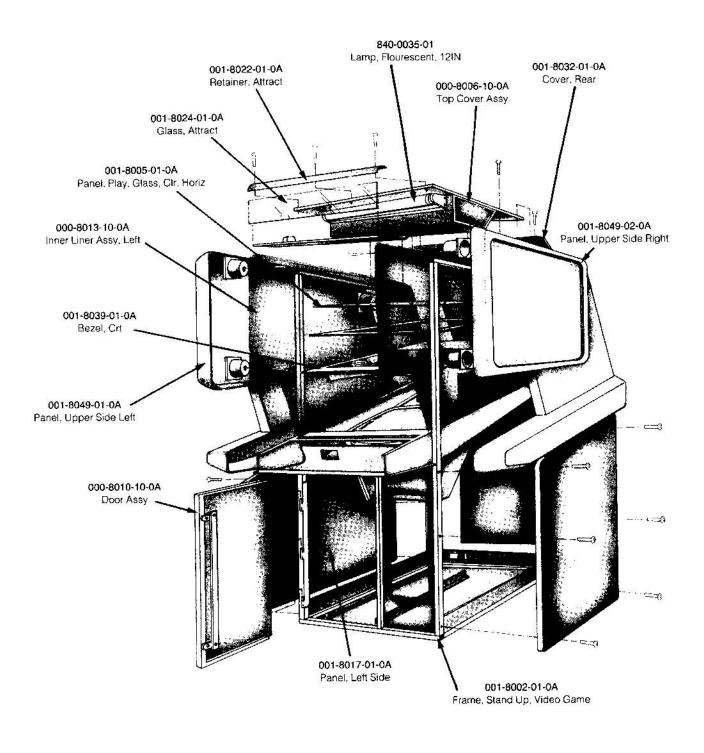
Chassis Assembly, SAC-1 (000-8001-10-0A)
